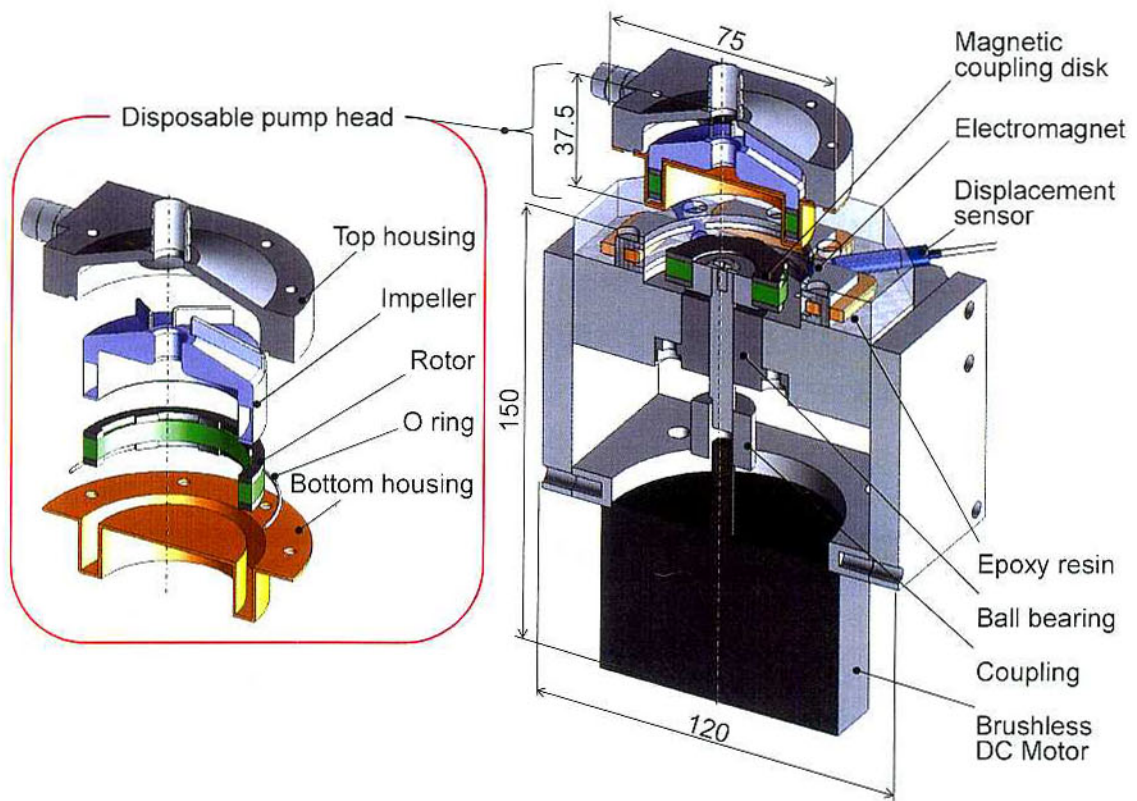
Configuration of the proposed MagLev centrifugal blood pump for extracorporeal circulation with the vane-shaped impeller
